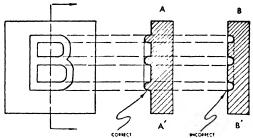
Bas-relief lettering or engraving. AA', raised letters on a molded piece allows engraving the mold — a cheap procedure. BB', sunken letters on a molded piece means cutting away the mold around the letter—an expensive operation.
